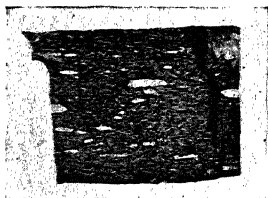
FRACTURE OF CHROME-NICKEL STEEL FORGING SHOWING DEFECT OF SILVER STREAKS; EACH WHITE ELLIPTIC AREA CONTAINS A SHORT THREAD OF GLASSY SLAG. NATURAL SIZE.
